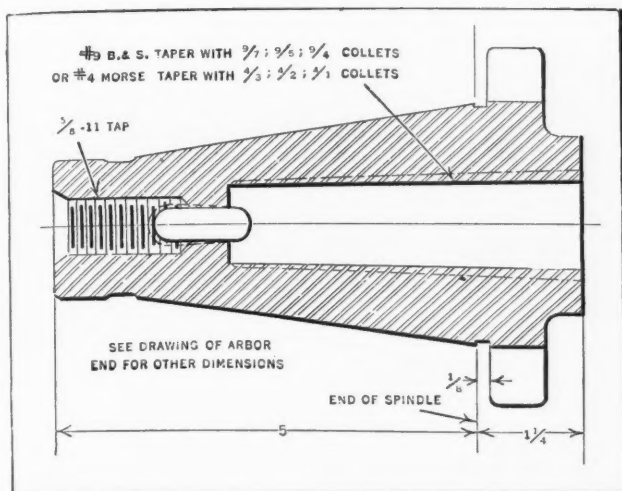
Adapter for New Standard Milling Machine Spindle End which Can be Used for End-mills and Collets with Tang Drive
